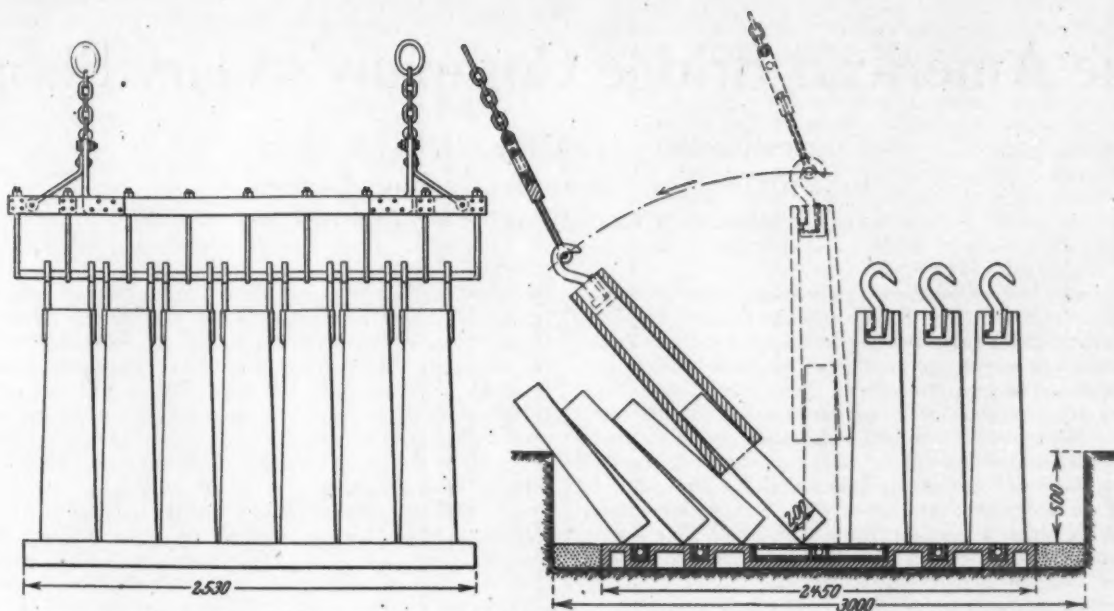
Method of Manipulation at Krumpach, Doing Away with the Shearing Operation—Dimensions in Millimeters
